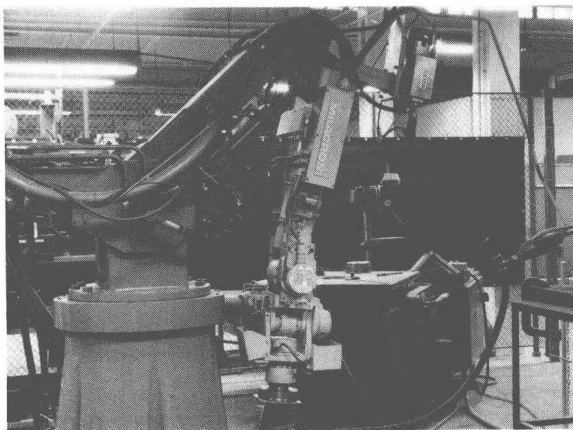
A Cincinnati Millicron robot used for welding.
